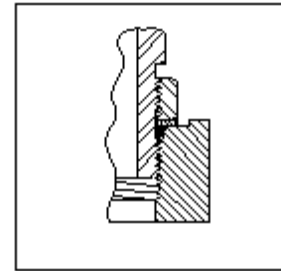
Maintain fitting orientation while tightening locknut to recommended torque
